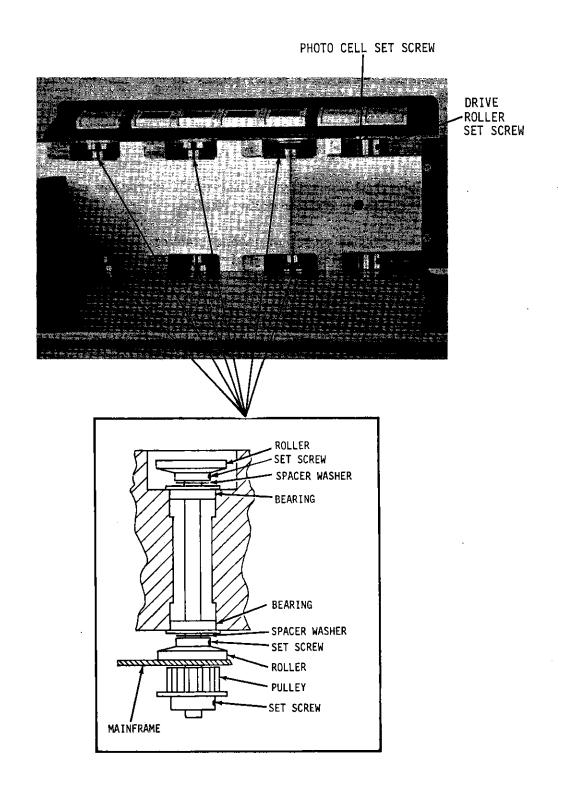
Pictorial, Stacker Roller Bearing Assembly
